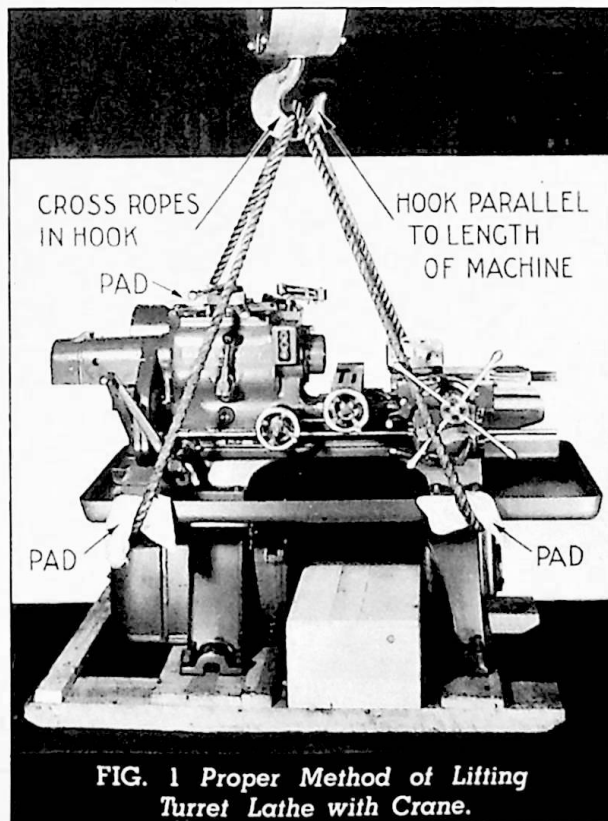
Proper Method of Lifting Turret Lathe with Crane.
